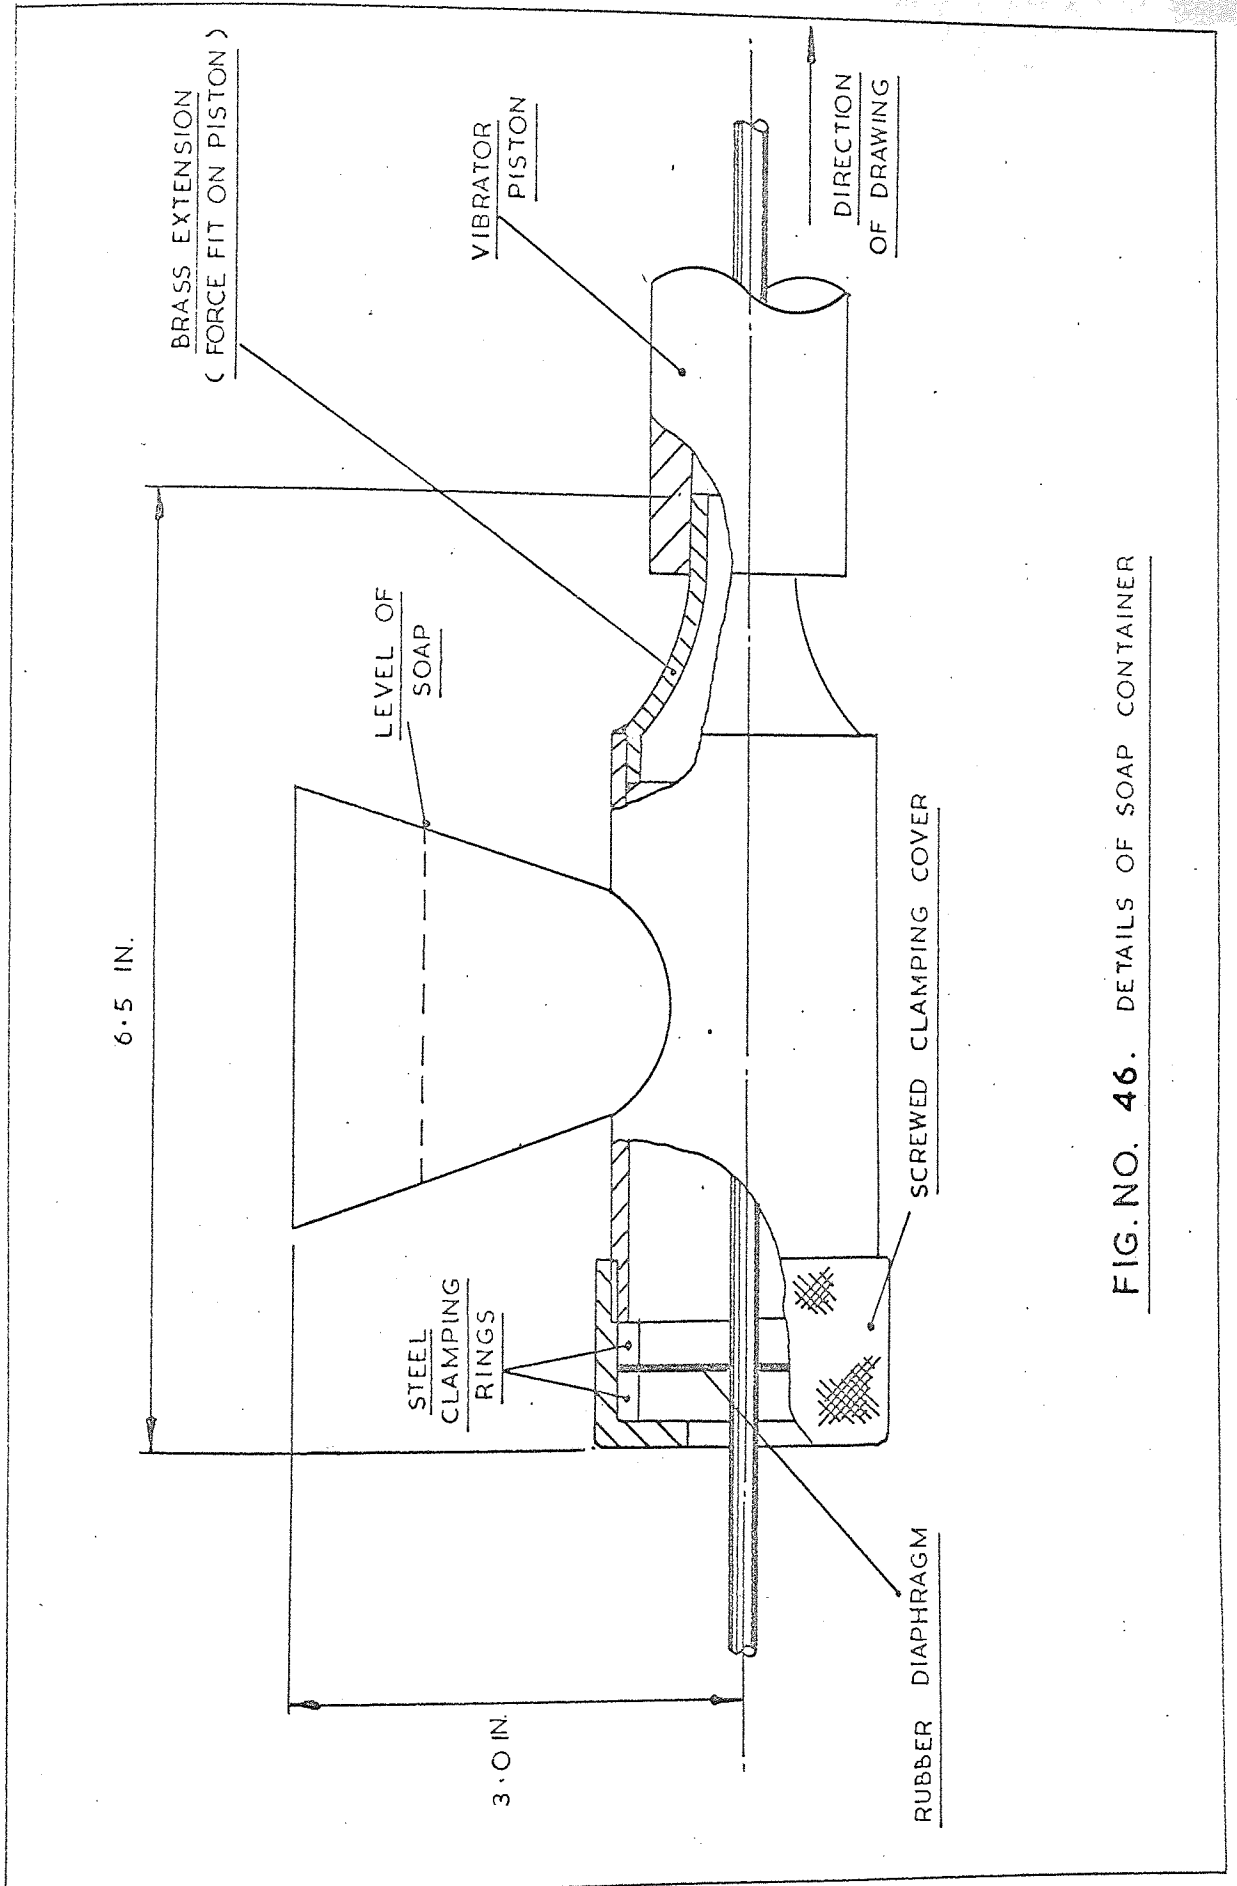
DETAILS OF SOAP CONTAINER
